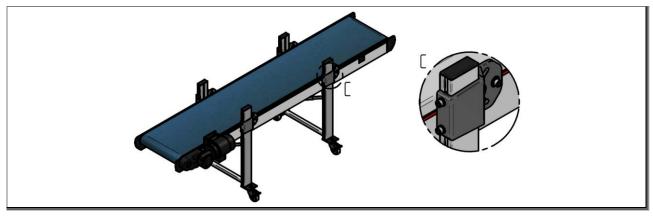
Overall construction assembly, conveyor with support AM 140 (typical)
